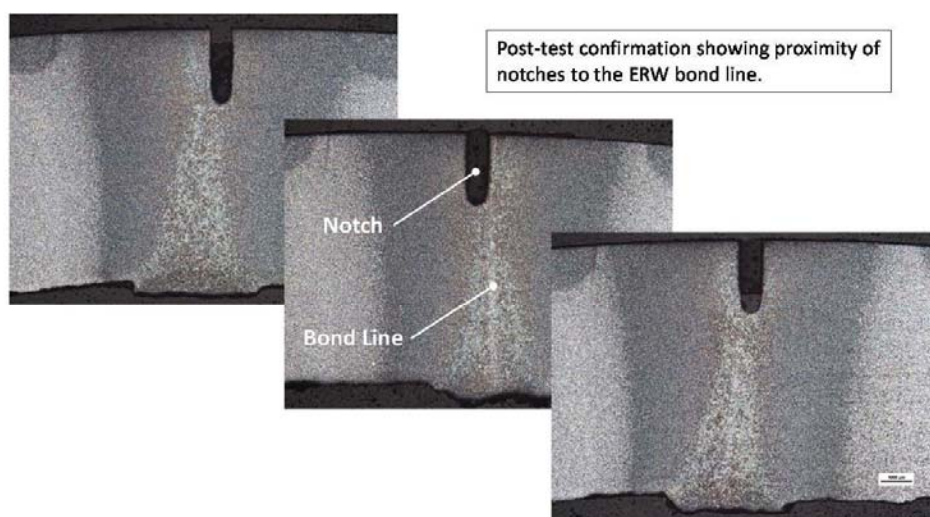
Sections of EDM Notches through LF-ERW Bond Lines of 16-inch pipe
